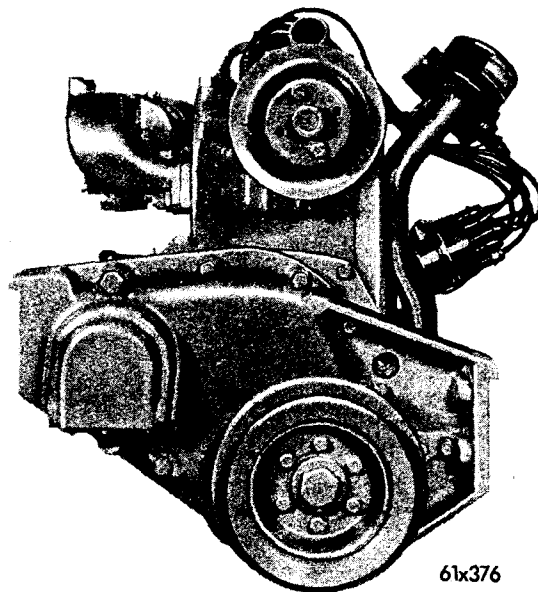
Special Accessory Drive Gear Front End Case Cover Installed
